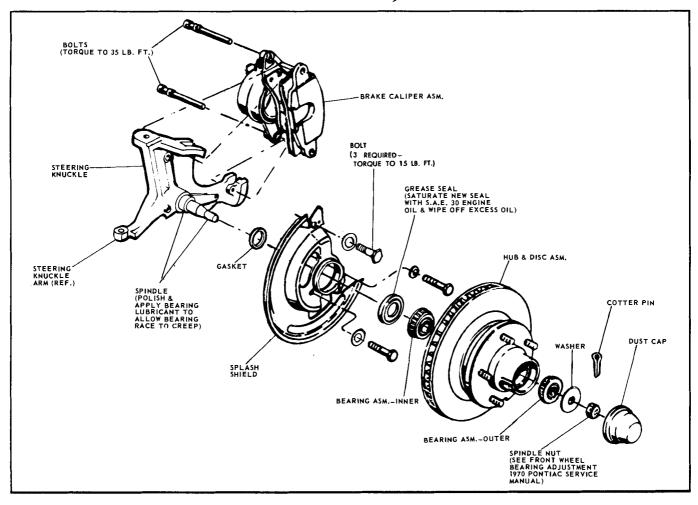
E-18 Installation of Steering Knuckle Hub and Disc Assembly - B and F Series
